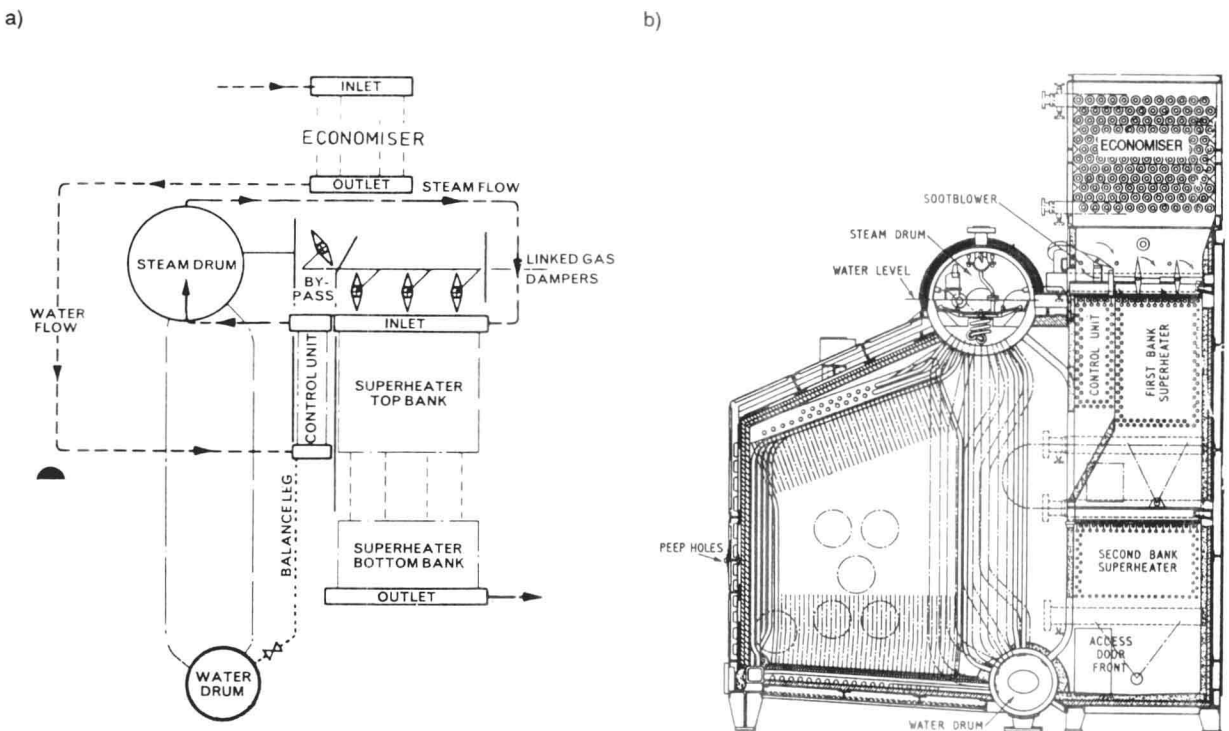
Foster Wheeler ESD II type boiler: a) flow diagram; b) sectional view.
